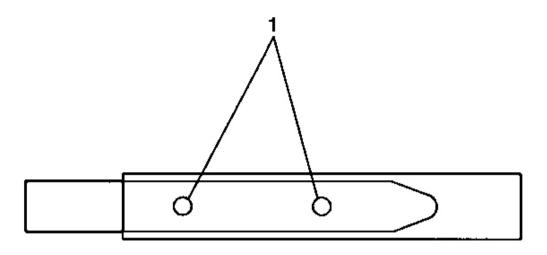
Inspecting Steering Shaft For Sheared Injected Plastic Courtesy of GENERAL MOTORS CORP.
